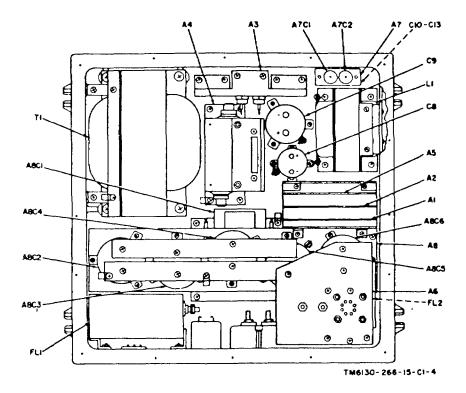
Power Supply PP-6224/U, top view, parts location.
